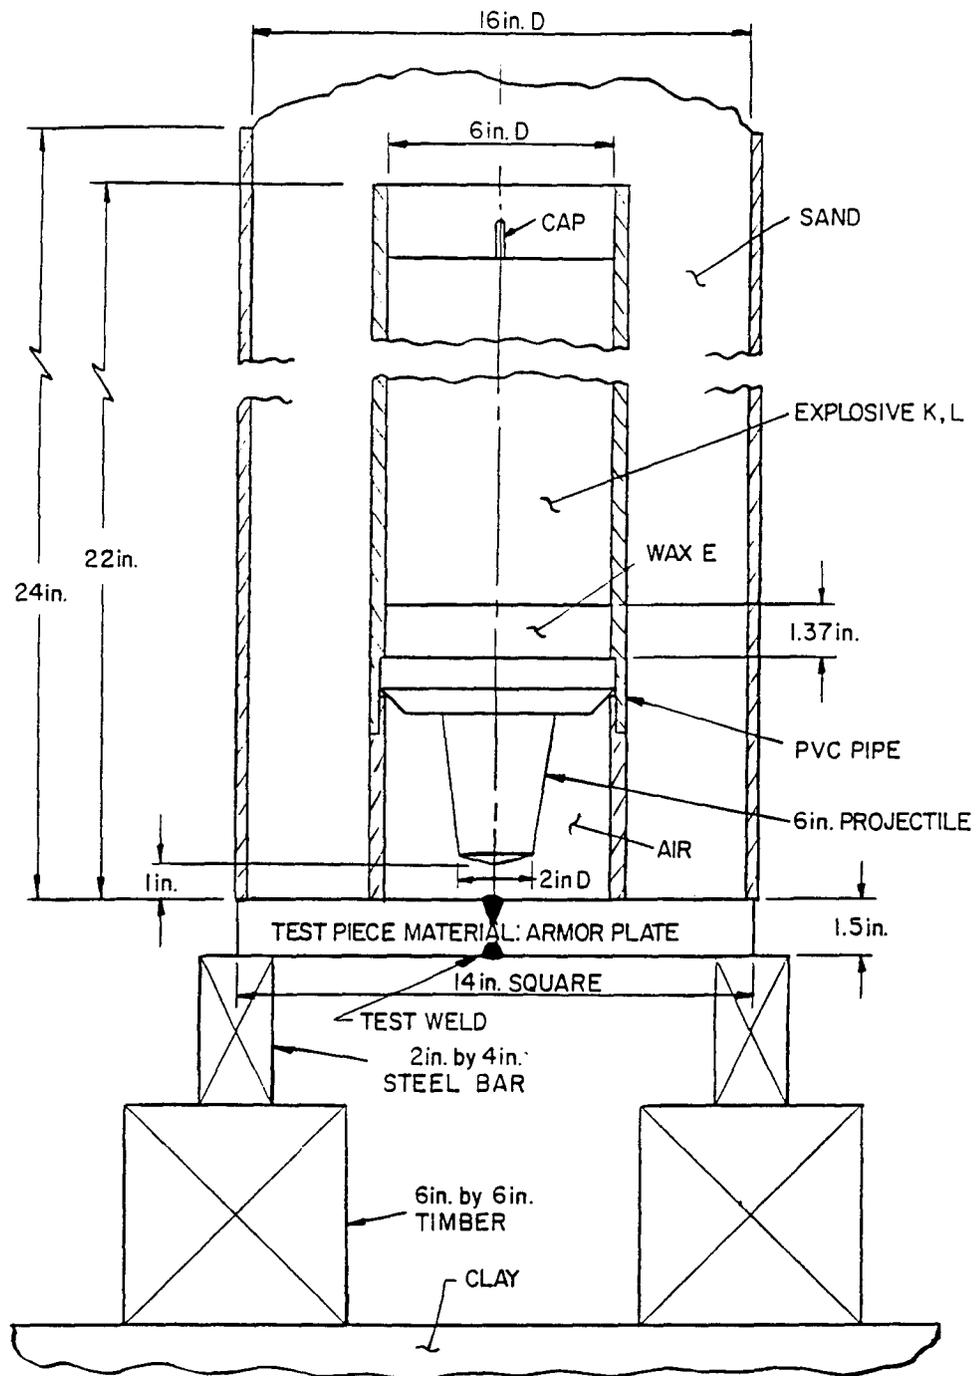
Typical Test Setup with 6-in. Final Charge Configuration (Letters in illustrations are keyed to columns in Table 5-2.)
